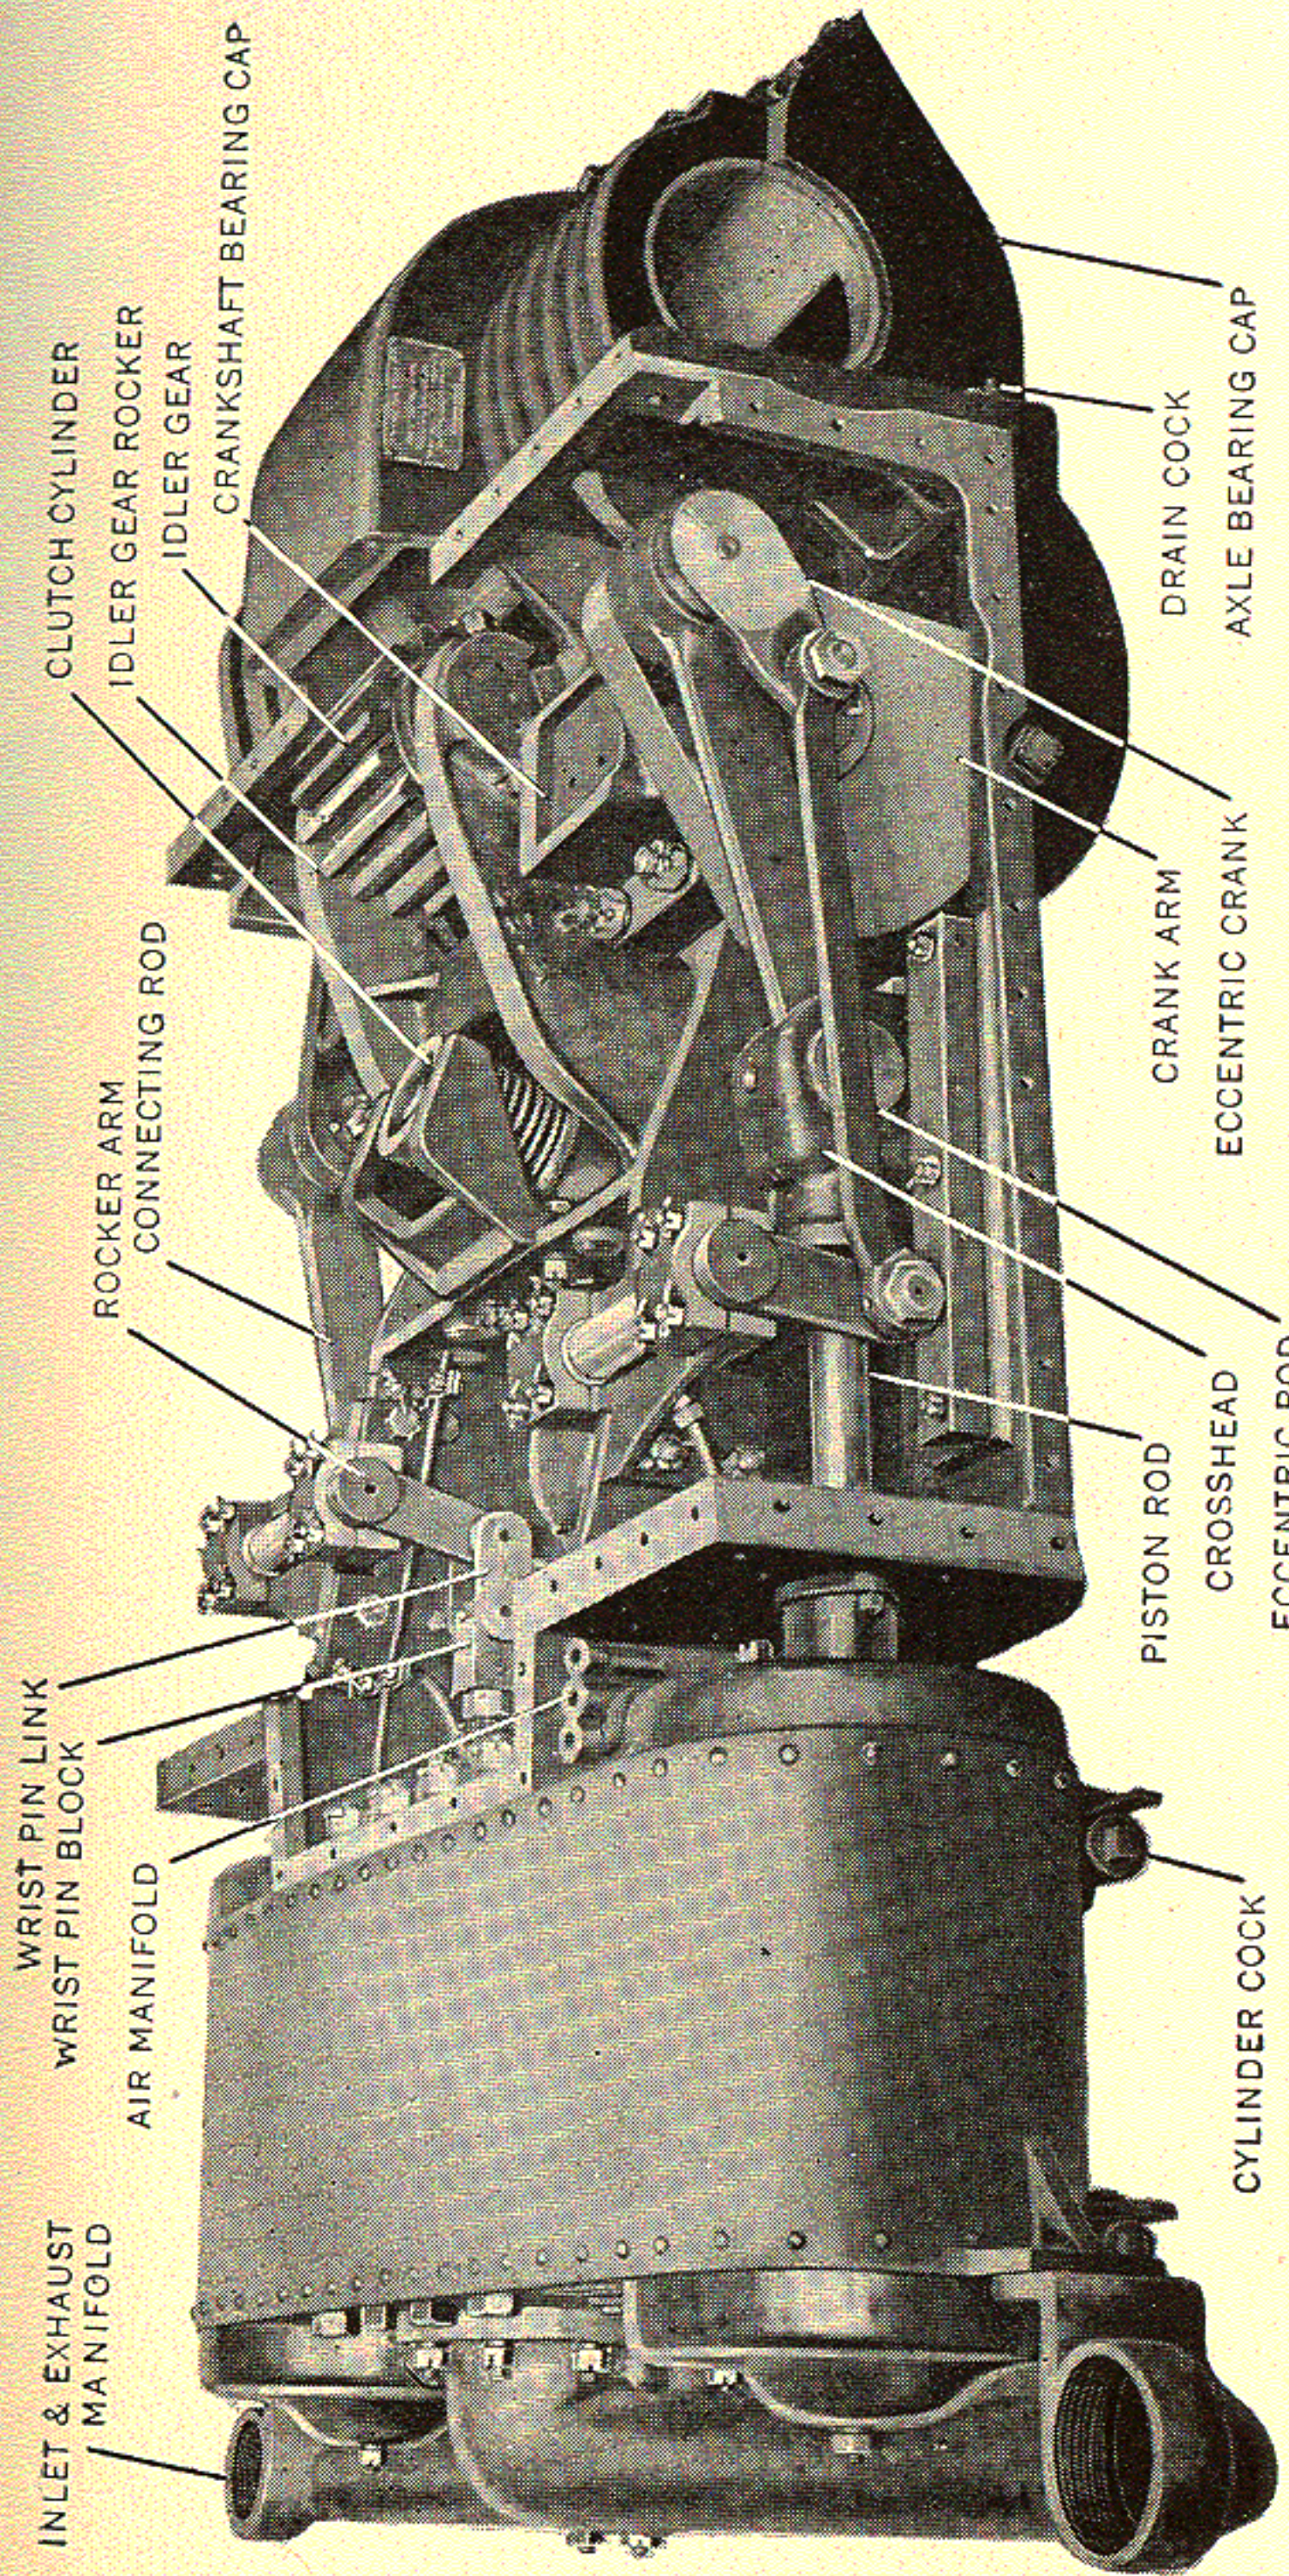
Type C-1 Booster Engine: Cover Plates and Casing Top Removed.
